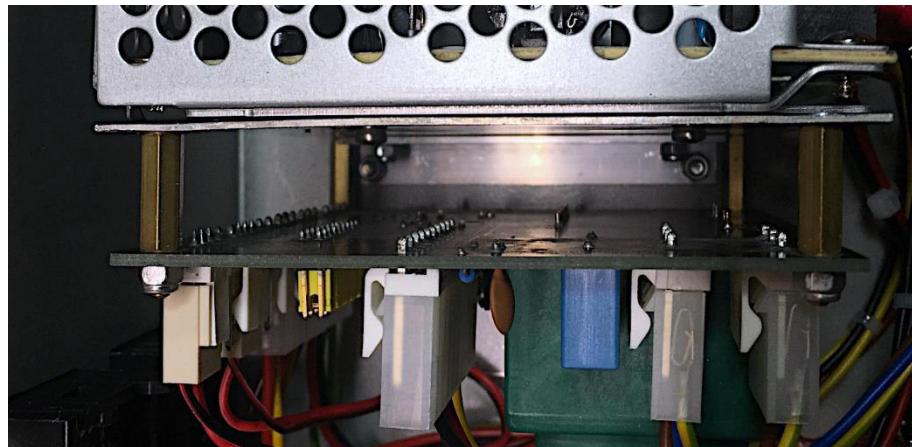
Mounting of the RD-50A and the PCB in the Hammond Case
